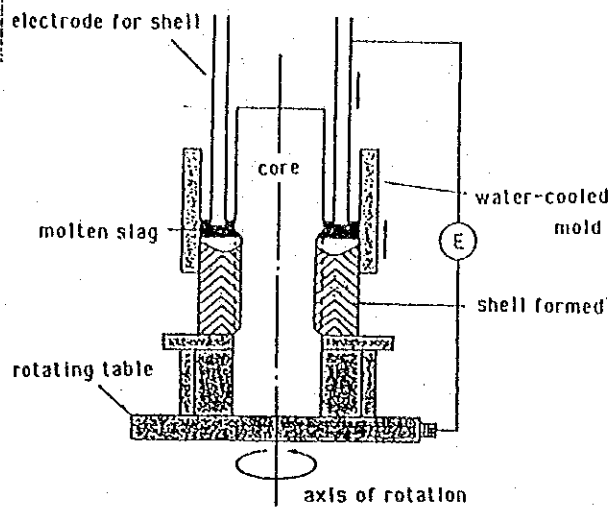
Composite casting by rotating electro-slag remelting¹⁴⁾
